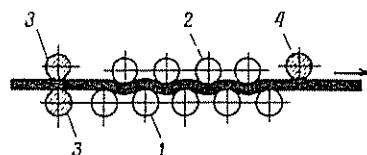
Diagram illustrating the straightening of thin plates (sheet metal): 1—lower work rolls; 2—upper work rolls; 3—clamping rolls; 4—auxiliary roll.
